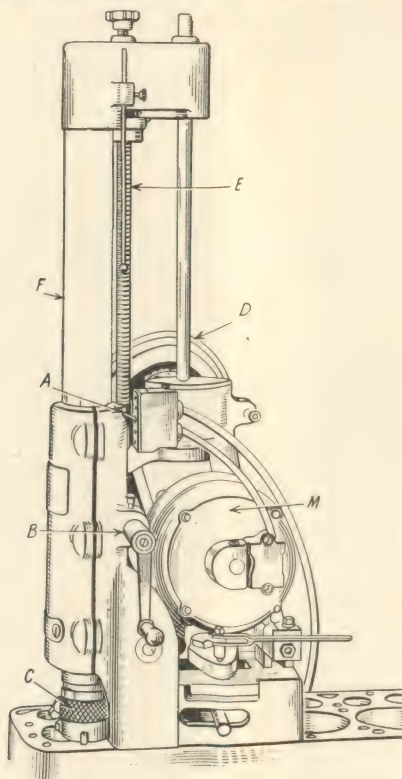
THE "STORM" CYLINDER BORING MACHINE
